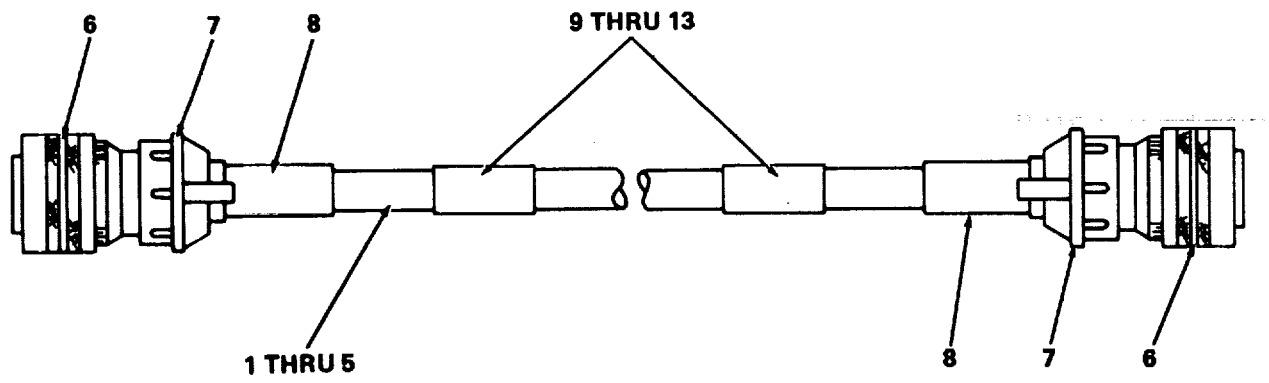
Cable Assemblies 1703-1-2136 (GR-GR. S)
